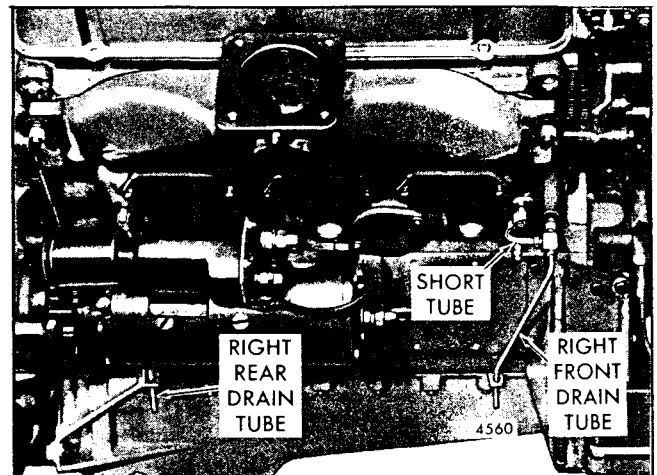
Air Box Drain Tube Mounting (8V Engine)
